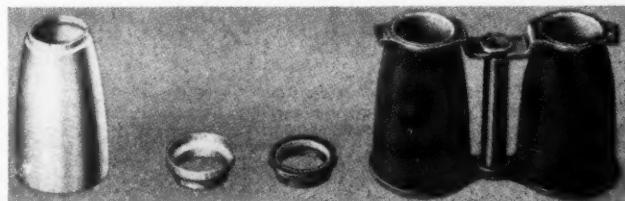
Illustration showing binocular parts in the blanked, drawn, necked, formed and assembled stages.
